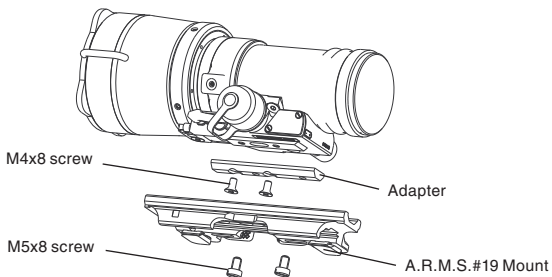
Assembling PS-27 with A.R.M.S. Mount using Adapter
